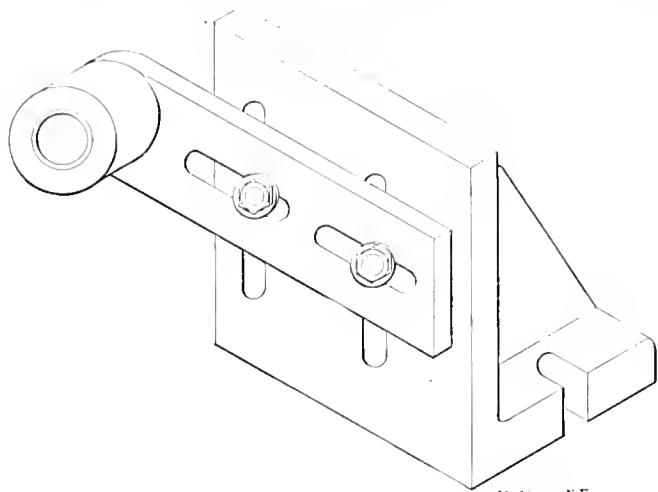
Bracket with Adjustable Arm for holding Boring Bar Bushings used with Fixture shown in Fig. 13.
